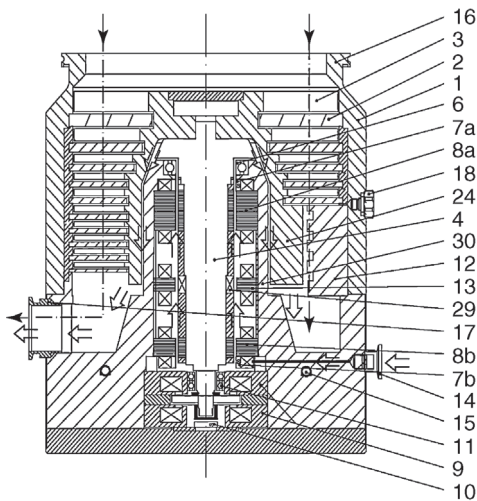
Magnetically levitated turbomolecular pump with bell-shaped rotor. The safety bearings support the rotor in case of a defect in the magnetic bearings. Pumps with ball bearings of the same design use grease-lubricated bearings which require a thin shaft yielding unfavorable dynamic behavior of the rotor. 1: housing; 2: stator; 3: rotor; 4: rotor shaft; 6: safety bearing; 7: radial sensor; 8:
